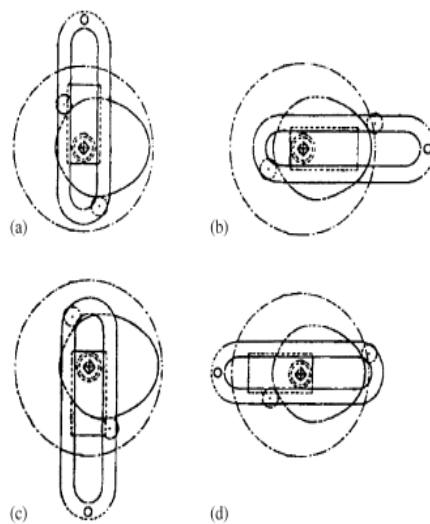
; Novel crank mechanism by Hue et al . (a) crank arm length is 175mm similar to the arm length of circular chainrings. (b) at 90 degrees maximum length is 200mm. (c) crank arm length returns to 175mm. (d) crank arm length is down to 150mm
